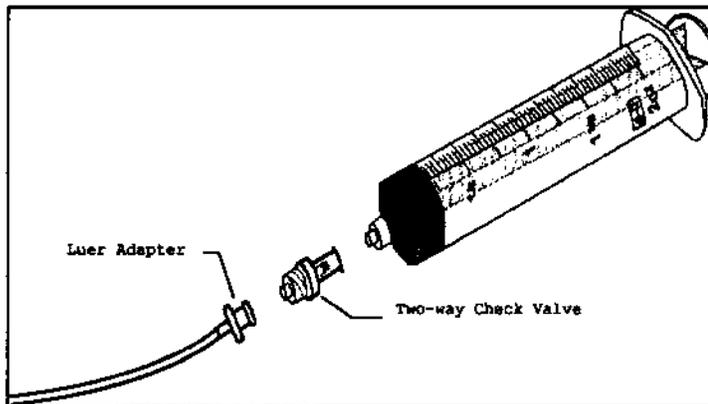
Luer lock, two-way check valve and syringe assembly.
